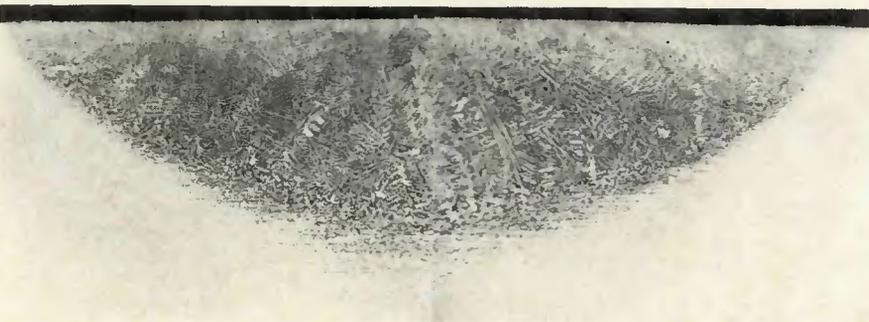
Photomicrograph of specimen Ba 20, transverse section. Weld made on 1/16 in. thick material. Etched with modified Marble's reagent. X50, reduced 20%
